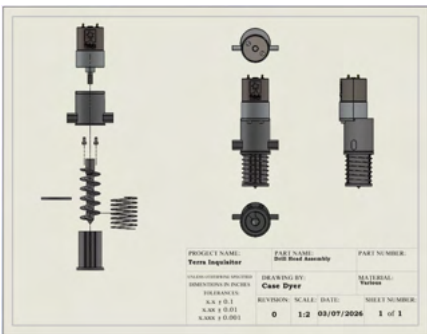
Printed auger supports and spring interfaces allowed the soil acquisition system to fit inside the HAUS Payload.
